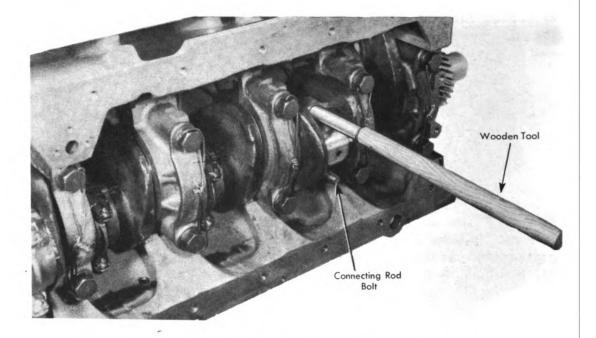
Guiding Connecting Rod Bolt Over Crankshaft Journal.
